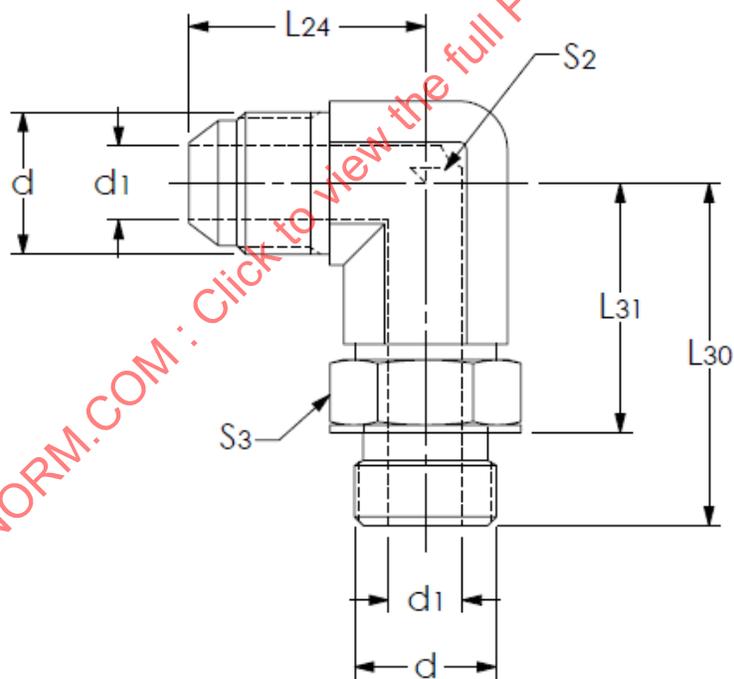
90 degree straight thread elbow, long (071520, 07M1520)
